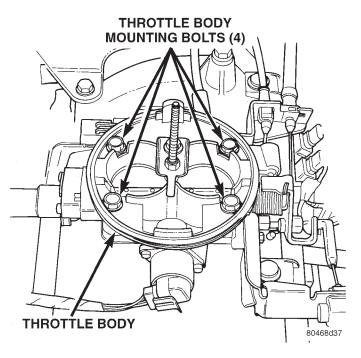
Throttle Body—5.2L/5.9L Engines—Typical
